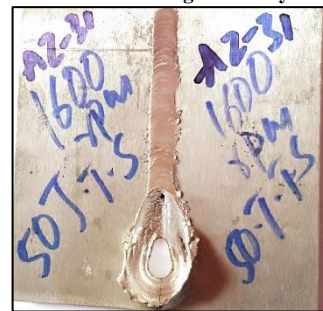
The weld was made at 1600rpm at 50 tool traverse speed with similar welding Az31 alloy
